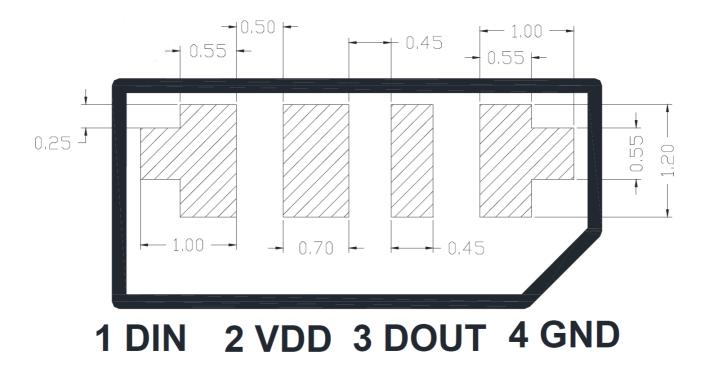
IN-PI42TAS(X)R(X)G(X)B Package Outline Dimensions
